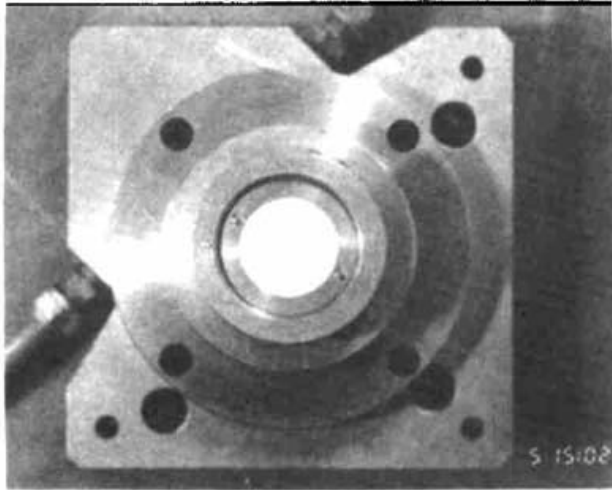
Picture of the uniform discharge using helical sprayed electrodes
